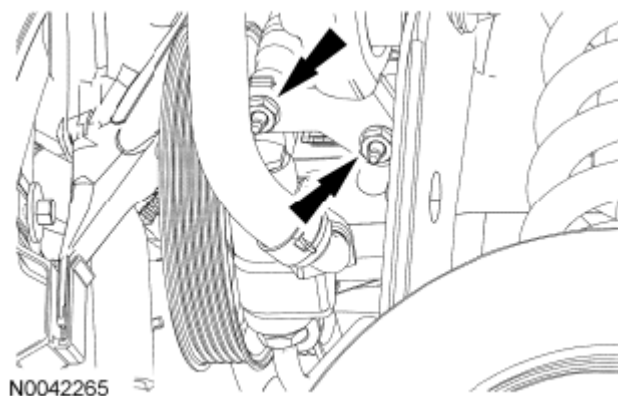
Identifying Wiring Harness Bracket And Nuts
